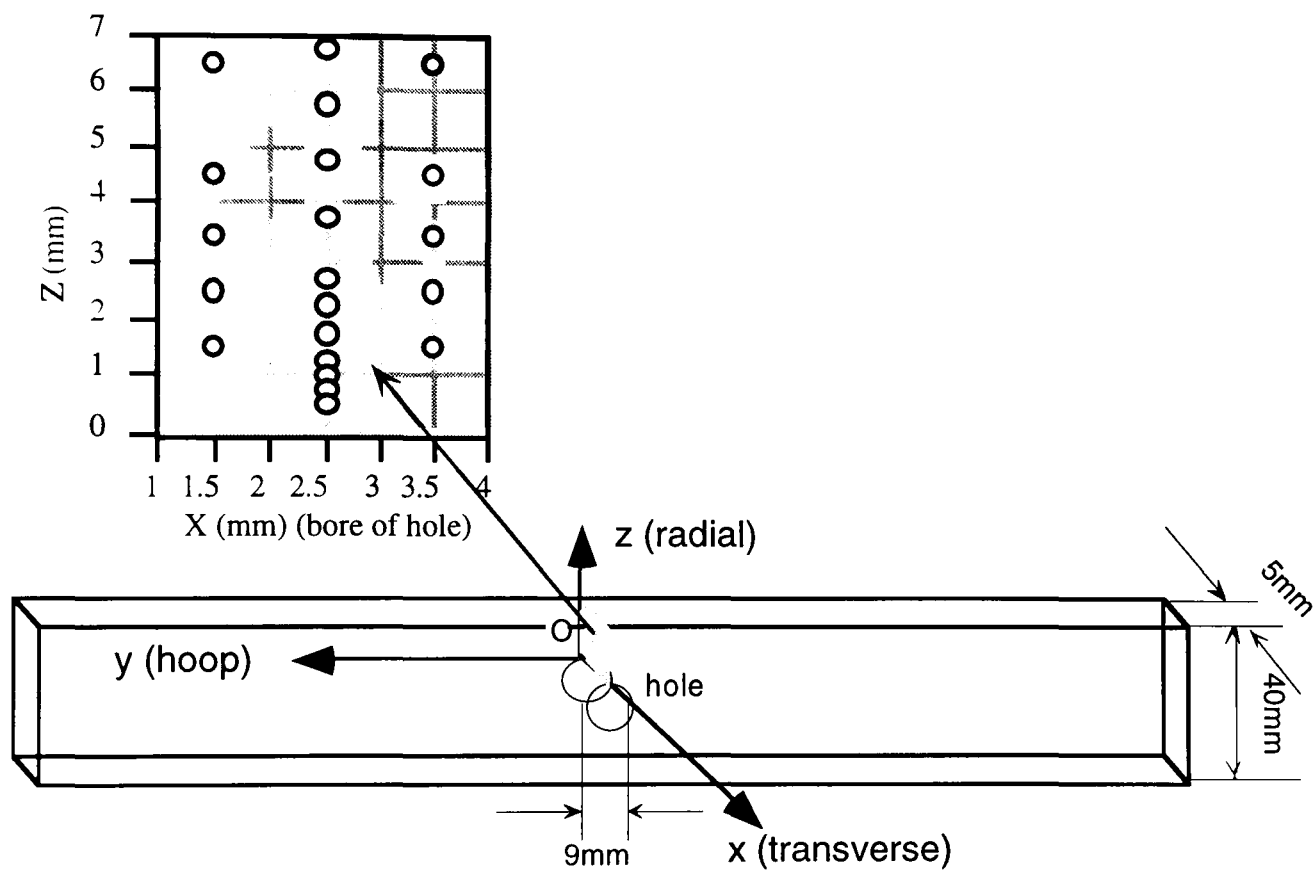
Dimensions of the cold expanded hole and measurement positions.
